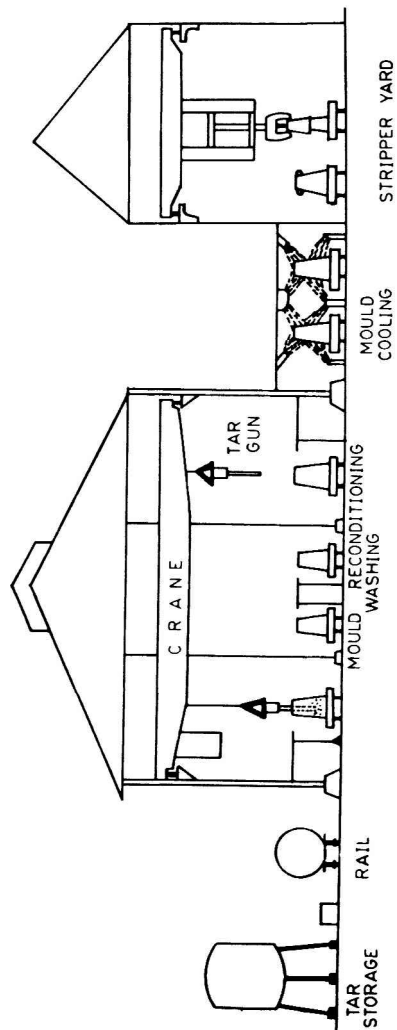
Mold stripper yard, mold reconditioning and assembly shop.
